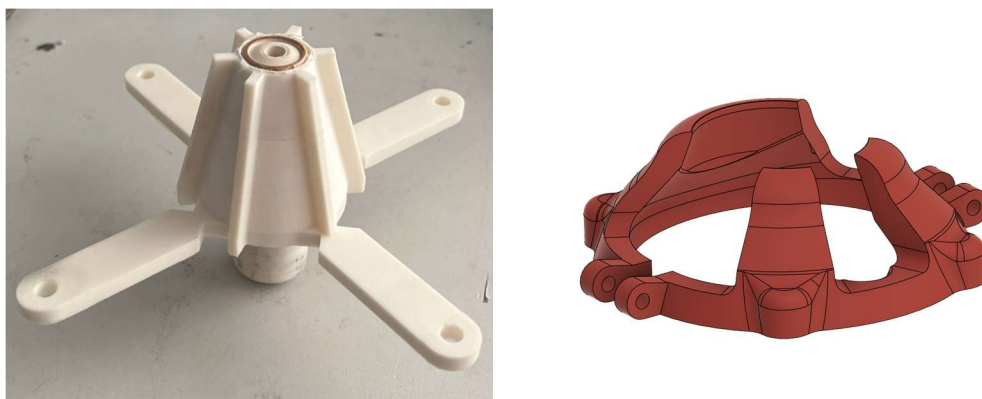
Igniter support with the black powder igniter inside (left) and Arrax engine interface (right)
